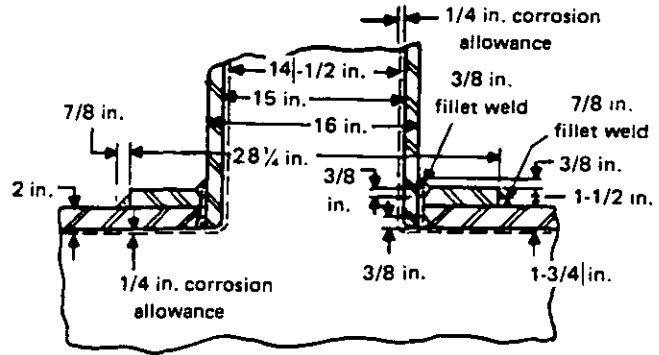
EXAMPLE OF REINFORCED OPENING
